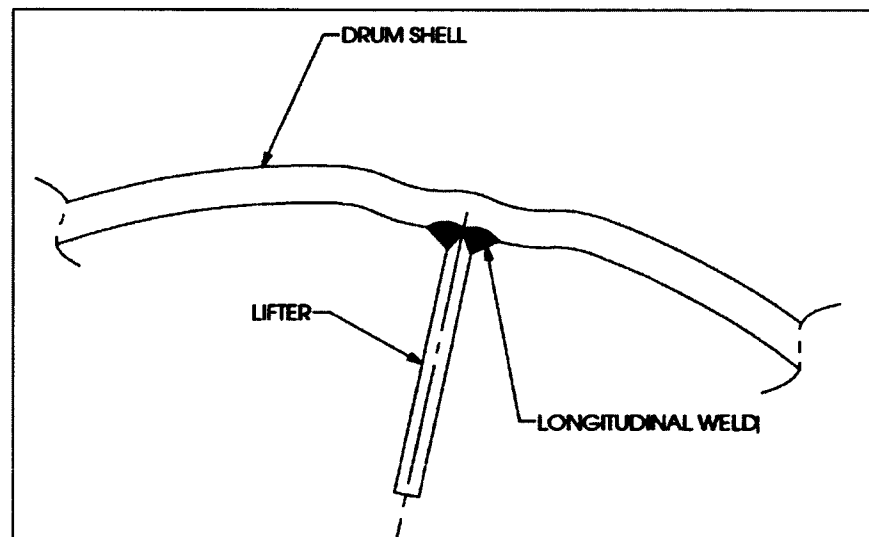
Run-out Defect, Lifter Longitudinal Welds.
